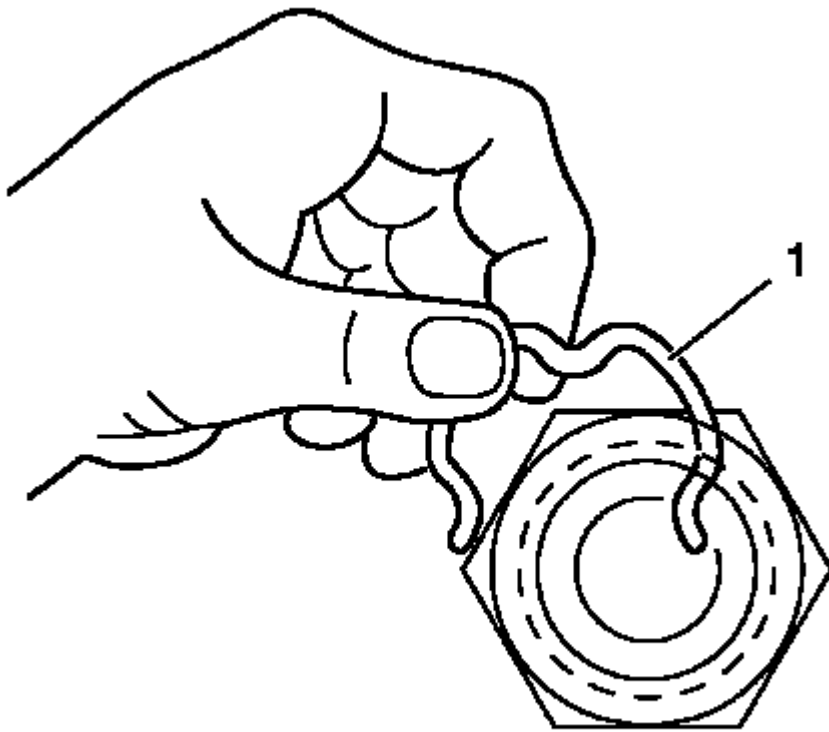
Automatic Transmission Oil Cooler Fitting Retaining Ring
